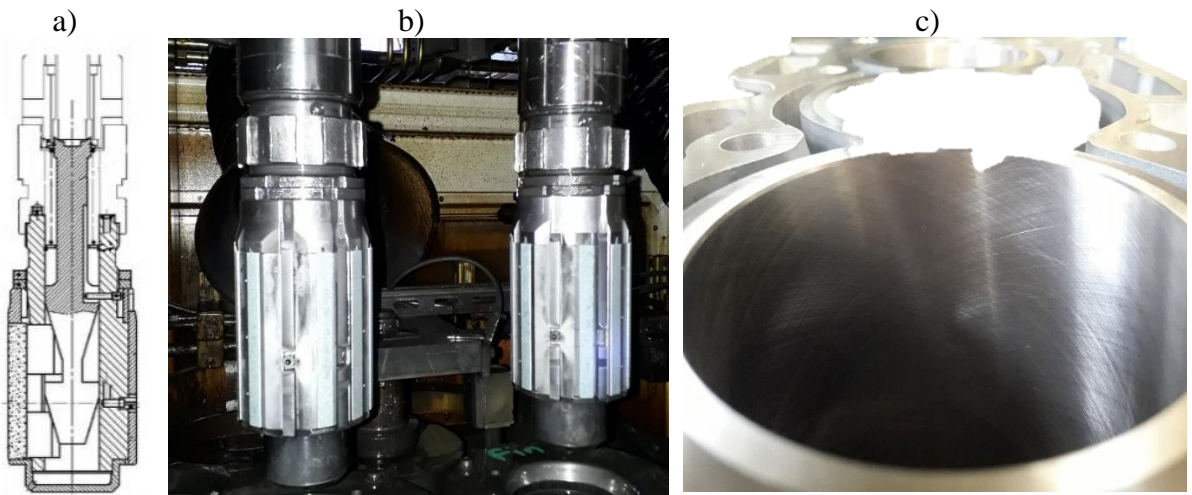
a) honing tool, b) honing tools mounted in machine, c) cylinder's surface after honing
